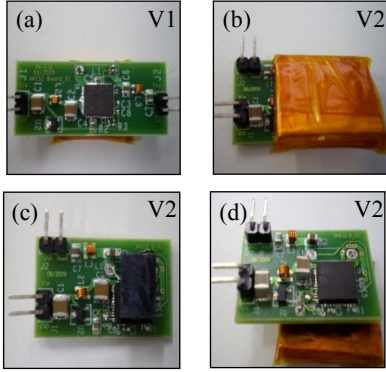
Converters prototypes, separated input and output (a) on V1, top (b) and bottom (d) PCB inductor mounting on V2, with solenoid inductor (c) on V2.
